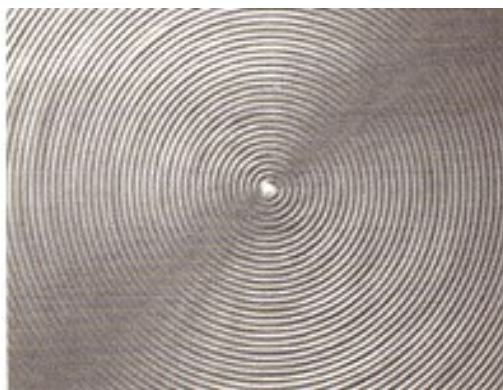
Example of workpiece surface formed by ultra-precision turning
